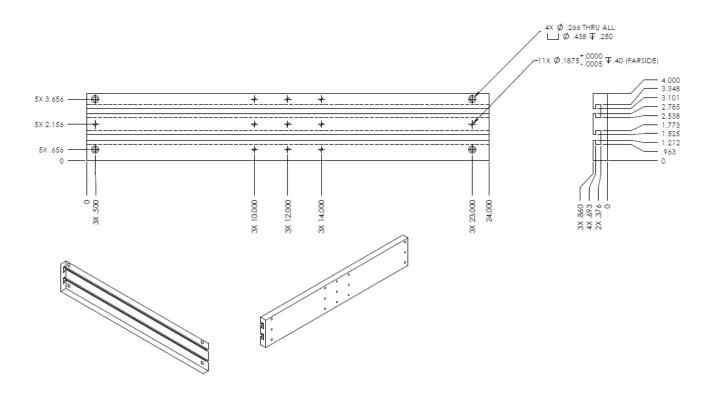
Mounting rail designed by Cambridge Technology shown with mounting holes on back side of plate
